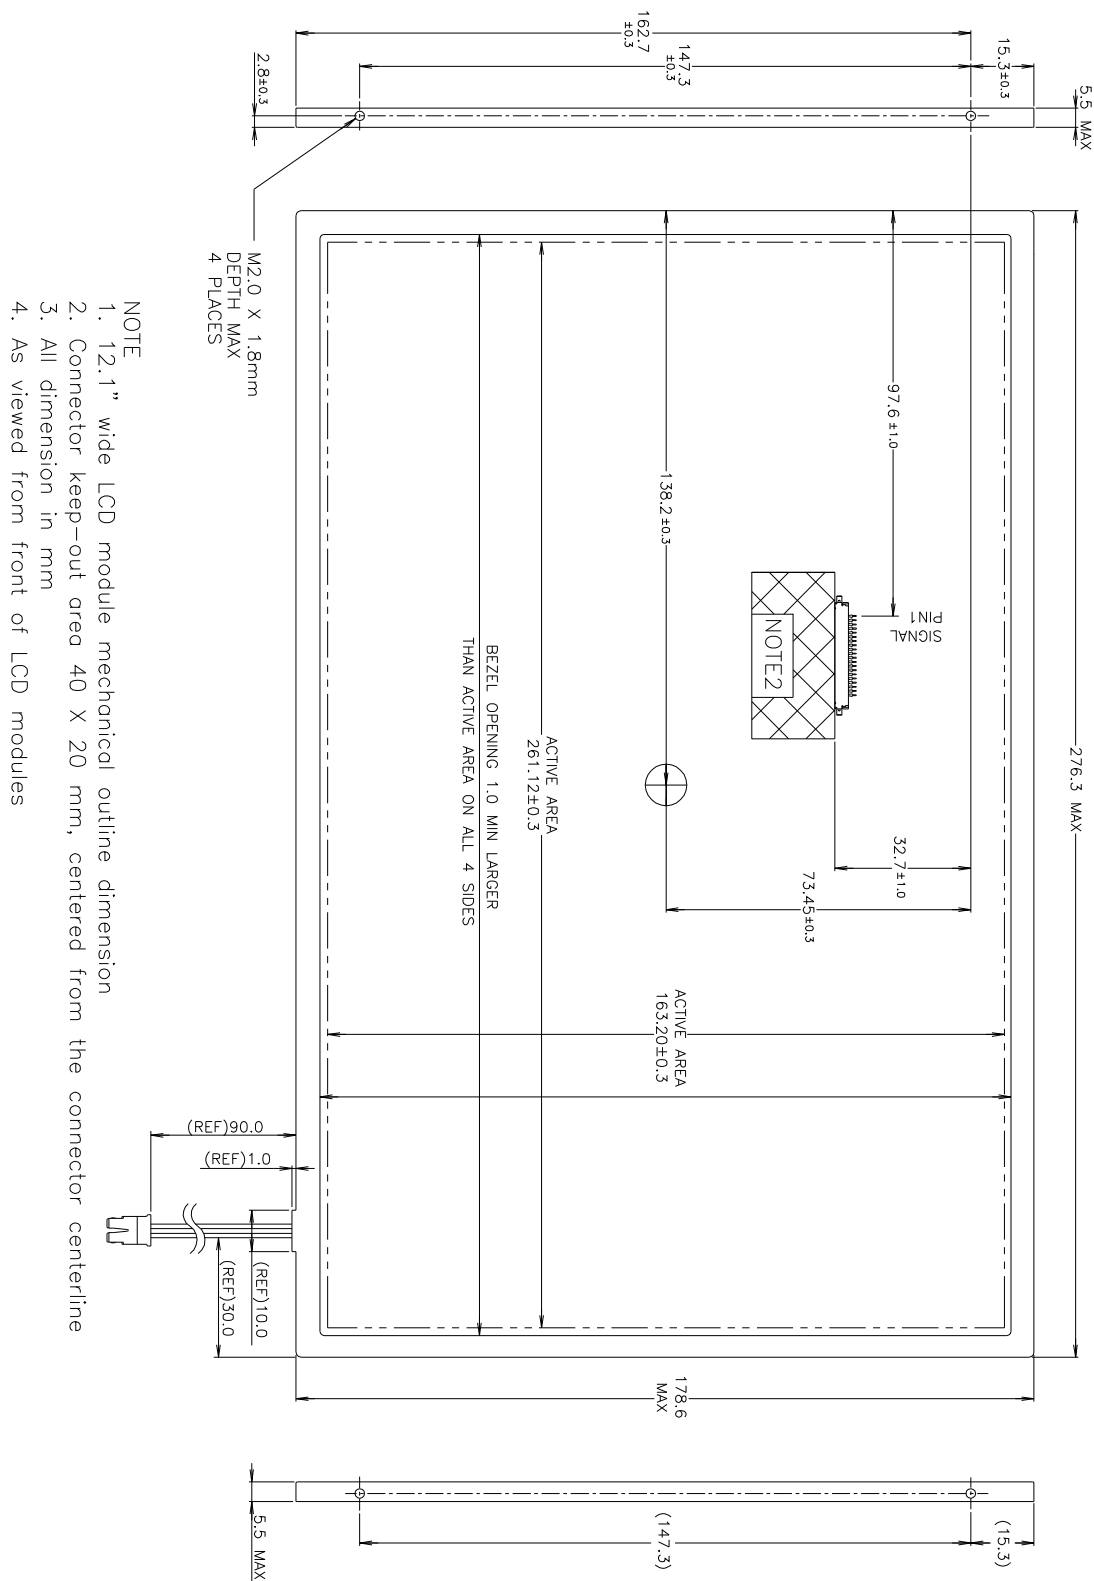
12.1-inch Wide Single CCFL Mechanical Outline Dimension (Front View)
